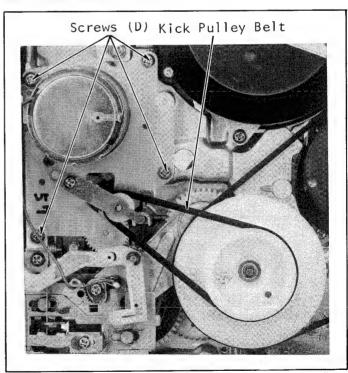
Adjustment of Cam Gear and Mode Select Switch - (10)
